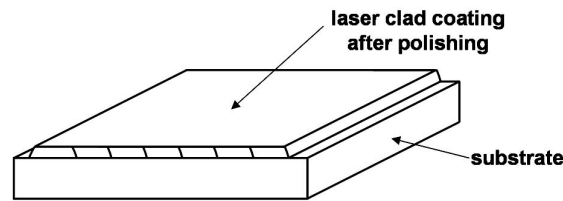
Drawing of laser clad coating (deposited on a substrate) after mechanical polishing of the surface.
